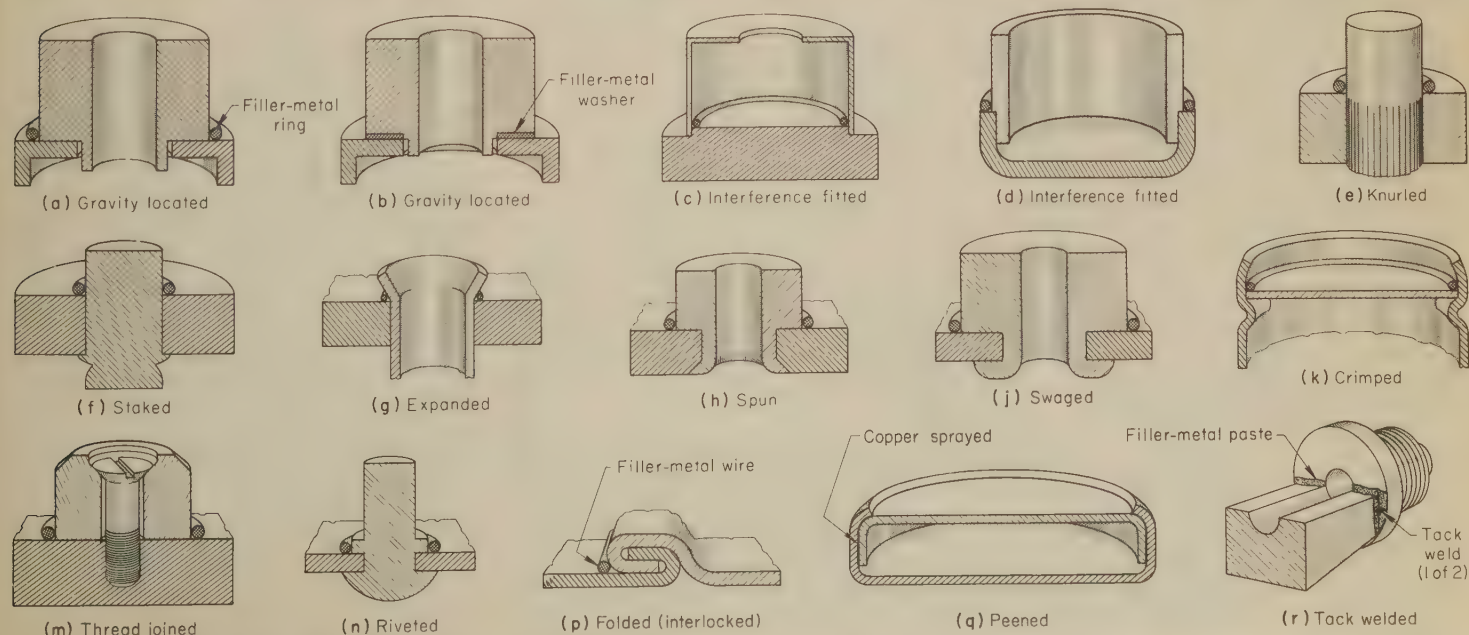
Assemblies illustrating the use of several methods of self-jigging, to hold components together for furnace brazing
